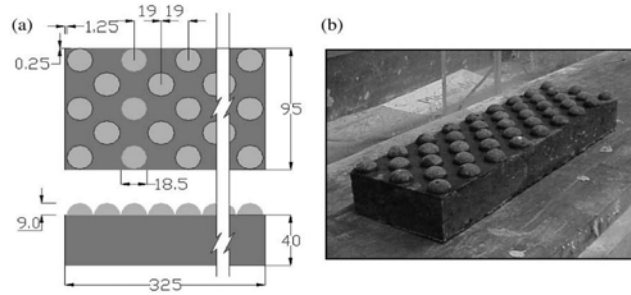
(a) Base dimensions with protuberances. (b) Photograph of the base
